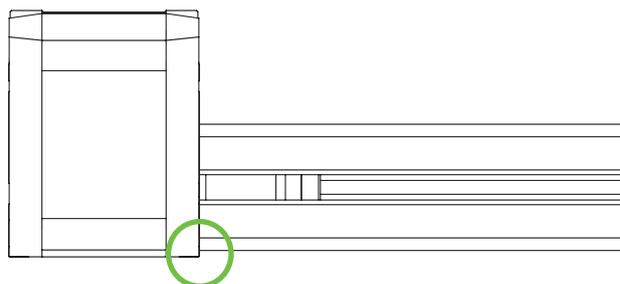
Correct connection of the spacer profile on the linear axis: no protrusion
